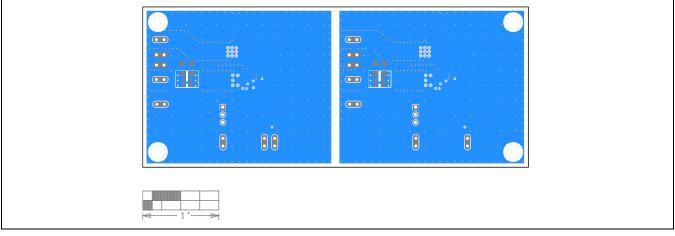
MAX17570B/MAX17570E EV Kits PCB Layout Diagram—Bottom Layer
